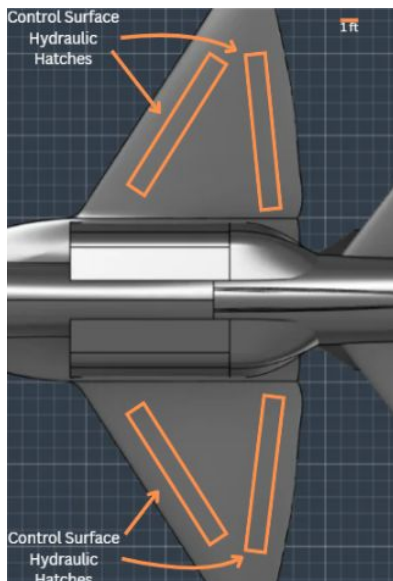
YFQ-75 Trident Bottom View - Control Surface Hydraulic Hatches
